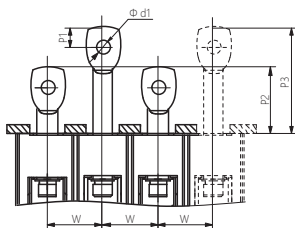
NXMS-400/630 back-panel wiring outline and installation size
